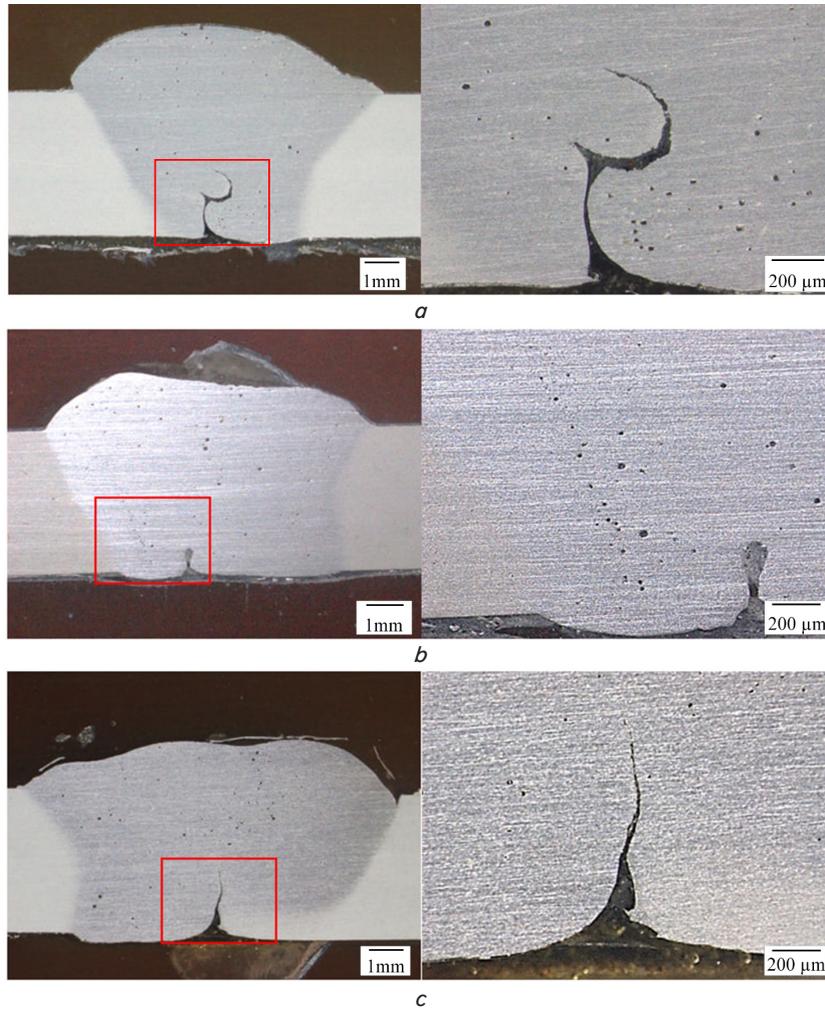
Cross-sectional of weld metal: *a* – 19HO; *b* – 27HO; *c* – 35HO
